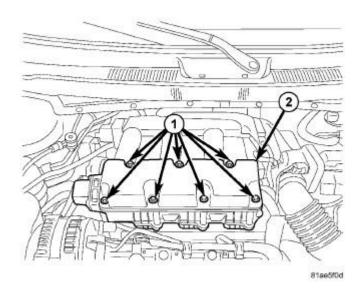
INTAKE RETAINER VIEW Courtesy of CHRYSLER LLC
